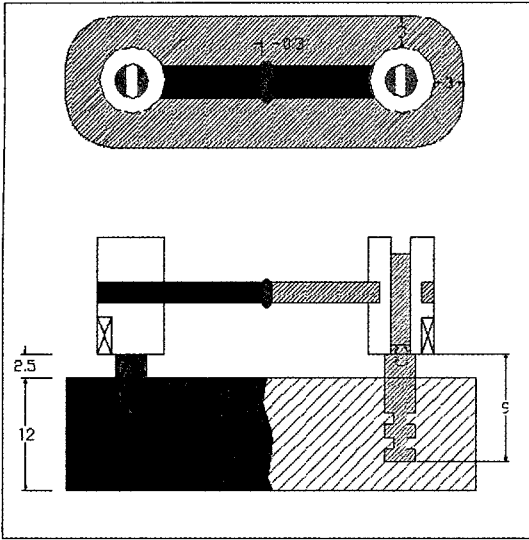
View of stage 3 : After fabrication of soldering block. (All dimension in millimeters [mm].)
